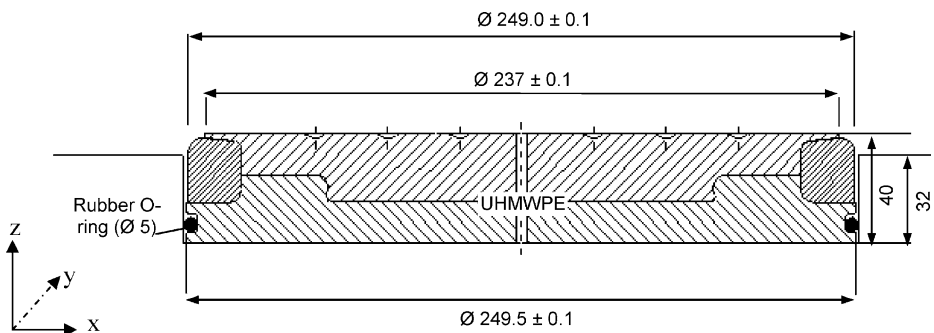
Full-scale composite bearing element (diameter 249.5 mm) with radial reinforcing carbon fibre/epoxy ring of diameter 249.0 mm in machined hole of diameter 250.0 mm (sample holder)
